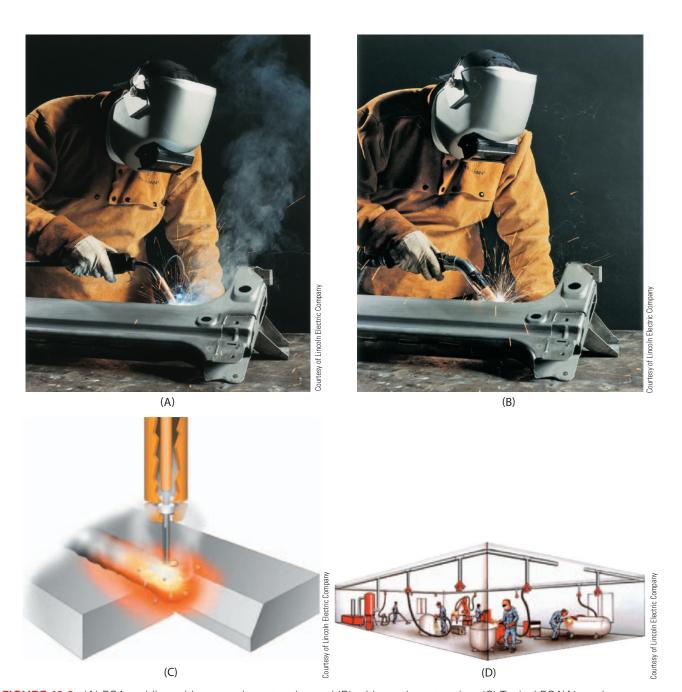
(A) FCA welding without smoke extraction and (B) with smoke extraction. (C) Typical FCAW smoke extraction gun. (D) Typical smoke exhaust system.
